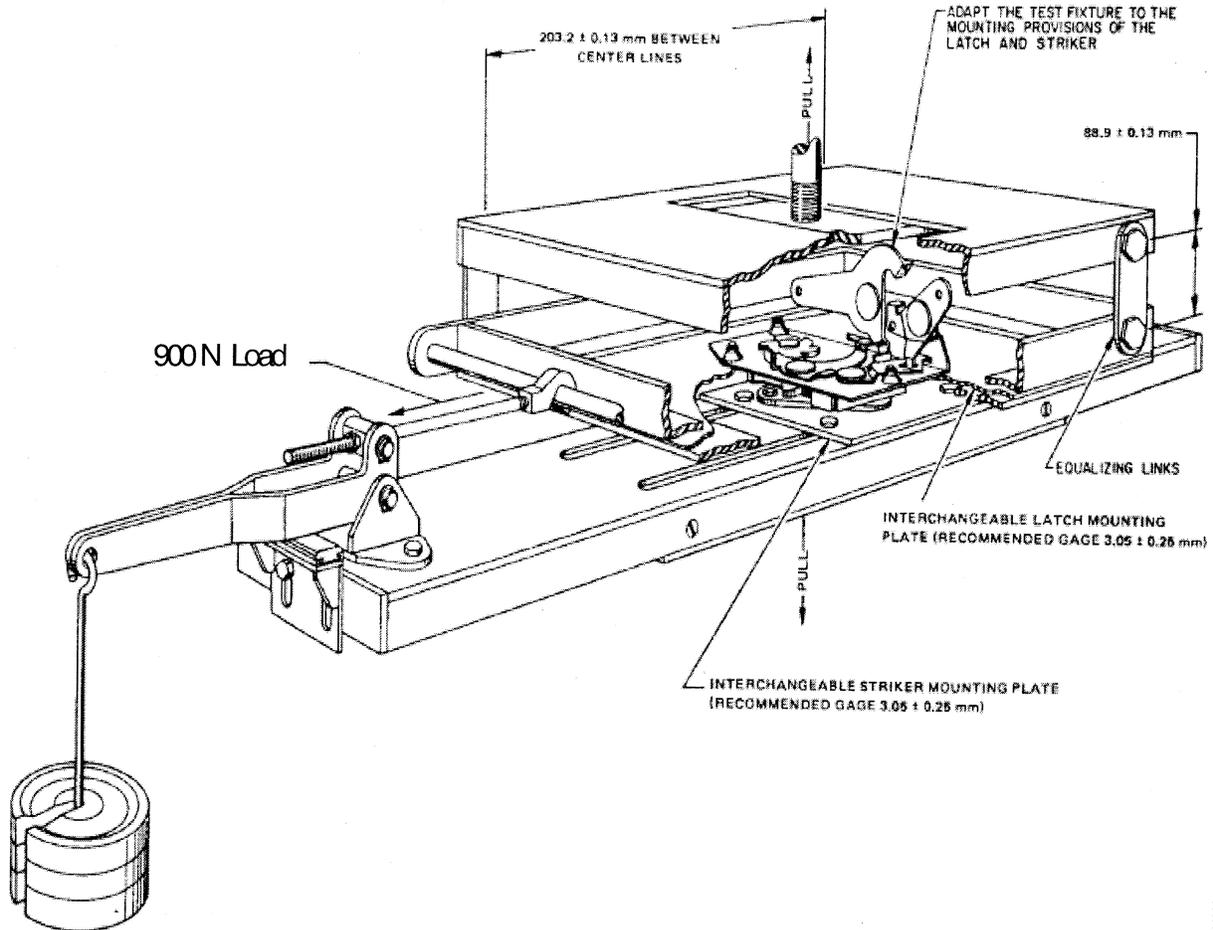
Door Latch - Tensile Testing Fixture for Load Test 1
